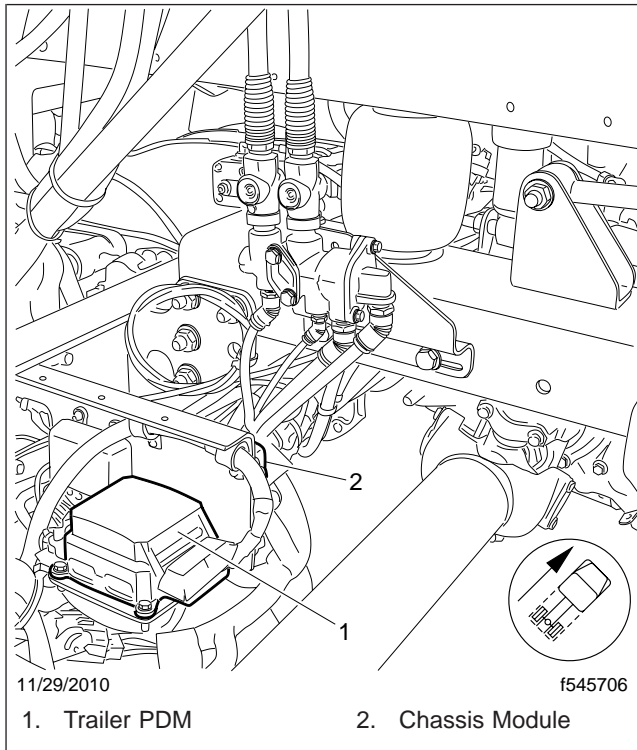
, EPA07 Trailer PDM (deck plate removed)
